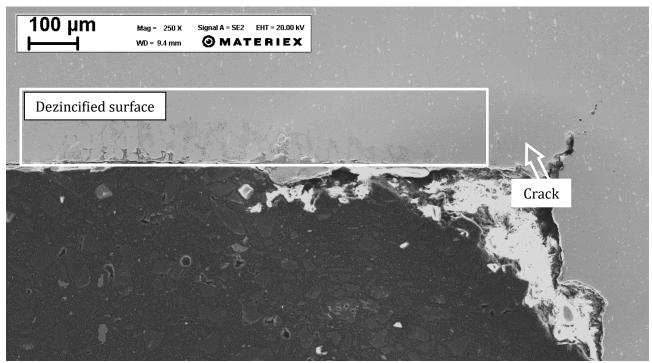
Dezincified surface and cracking in part A of non-leaking fitting (SEM).
